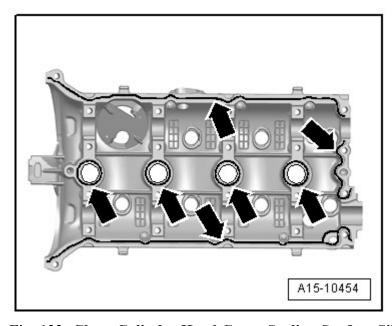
Clean Cylinder Head Cover Sealing Surface Silicone Sealant Locations
